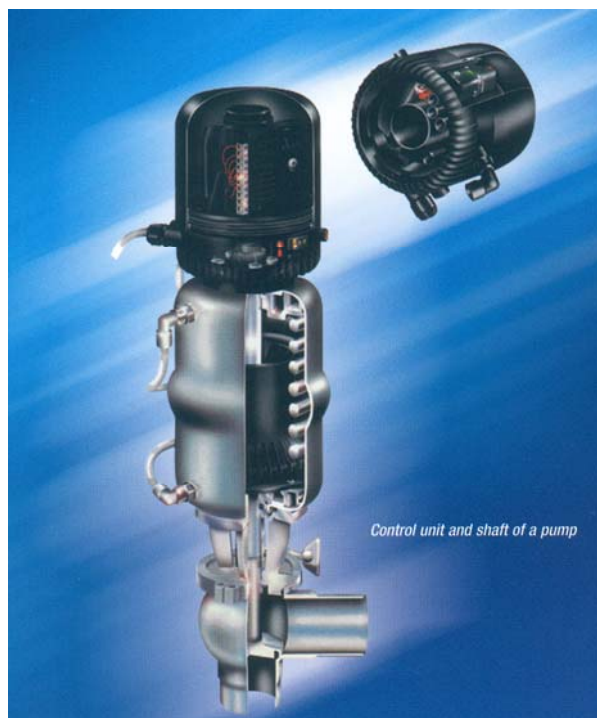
Precision engineering and mechanical engineering: control unit and shaft of a pump
